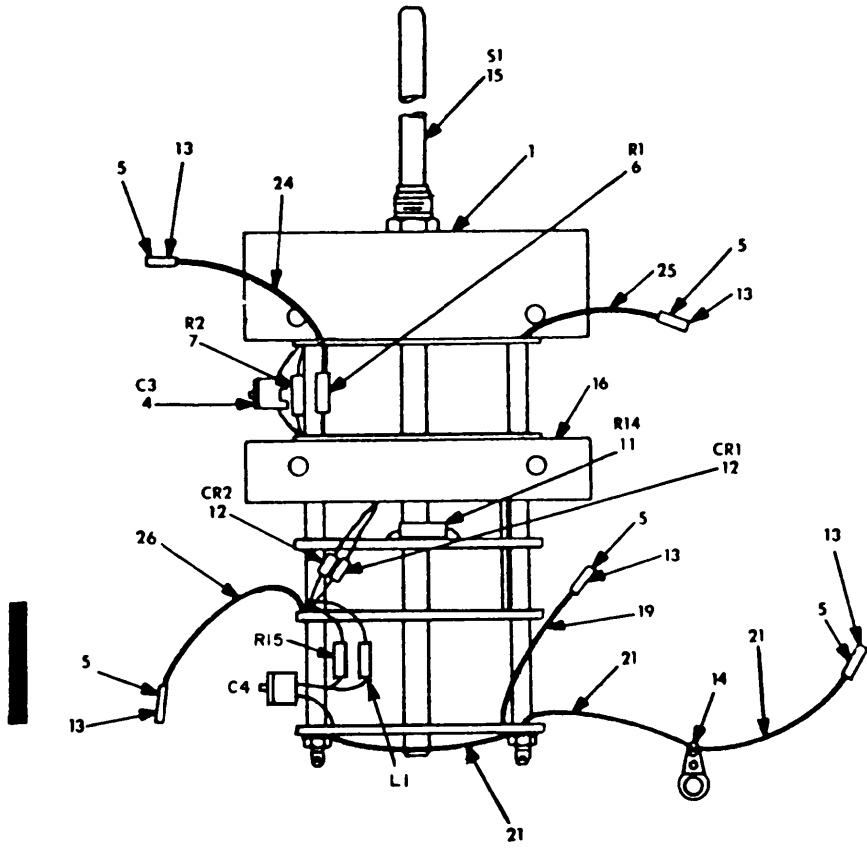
Circuit board assembly A2., resistor location diagram.
